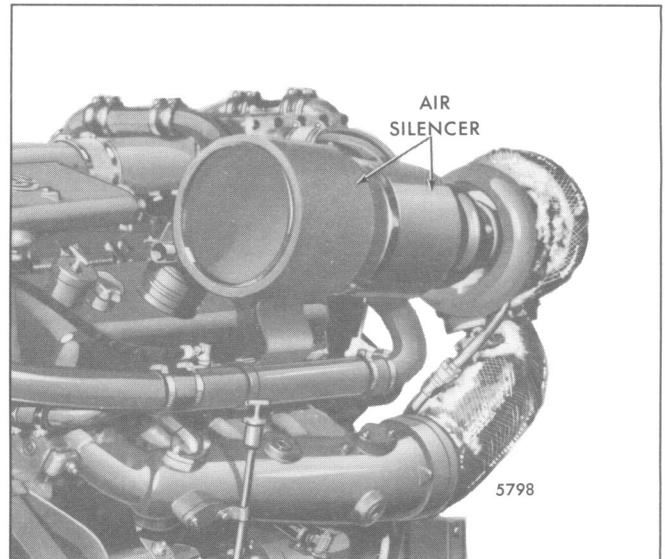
Air Silencer Mounted on 6V-92TA Engine
